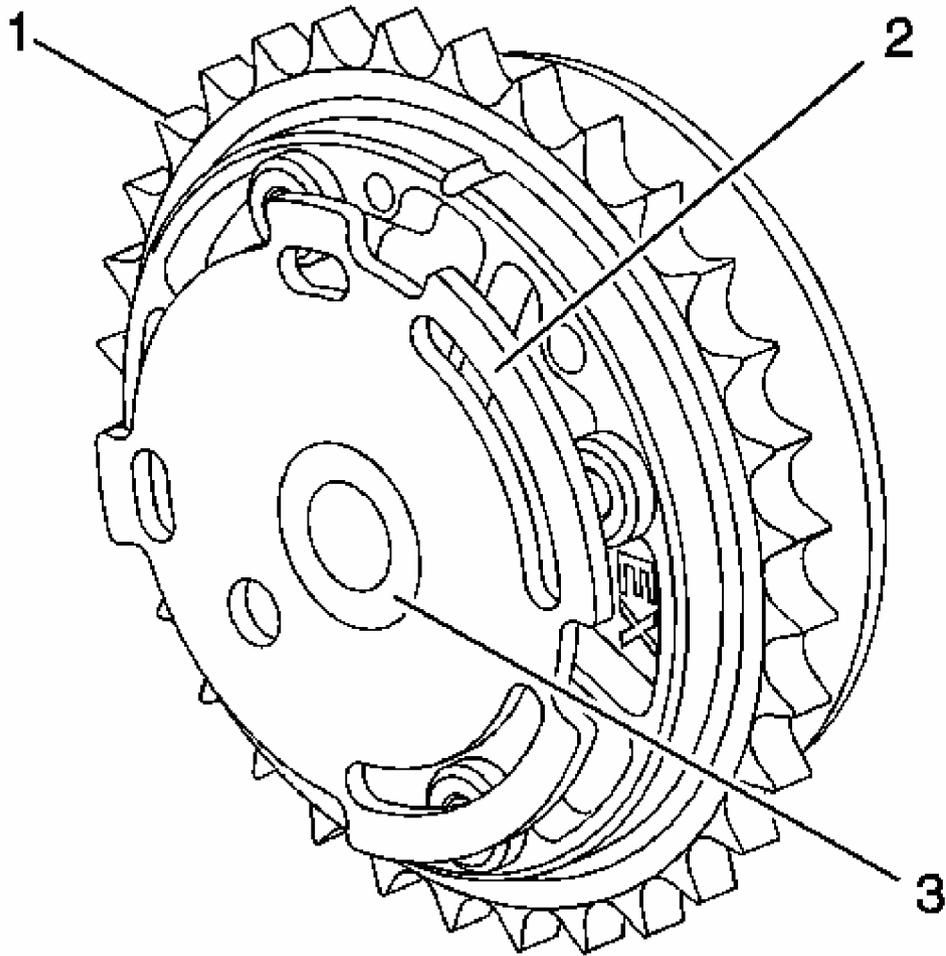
Inspecting Front Of Exhaust Camshaft Position Actuators
